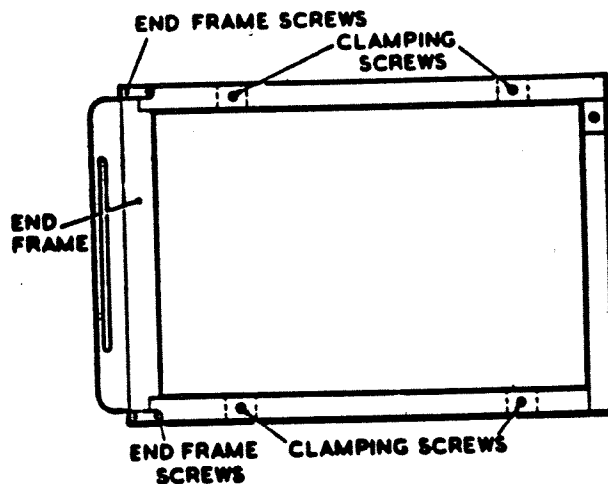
A-5. Mounting of I385 Xerox Plate in Frame
